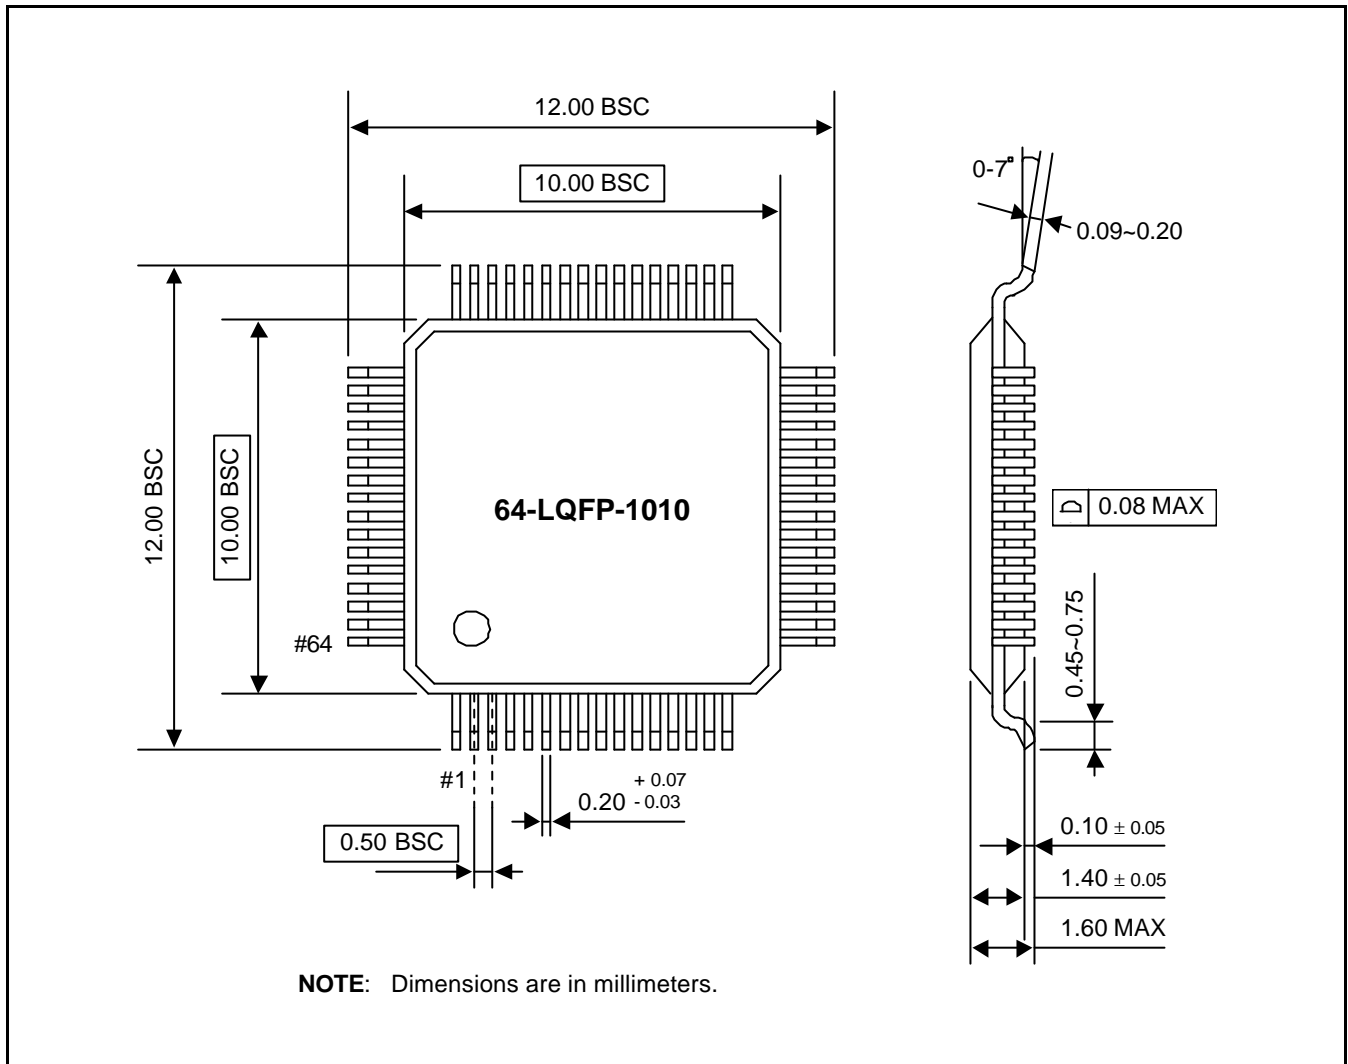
64-Pin LQFP Package Dimensions (64-LQFP-1010)
